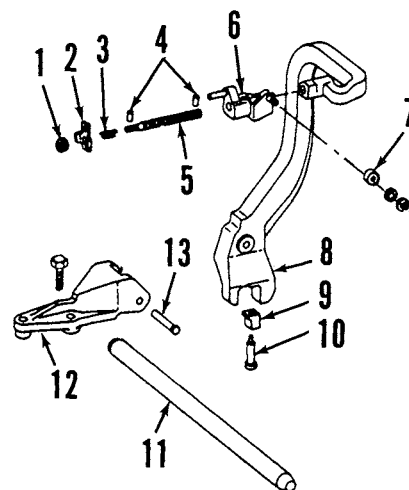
Typical load control arm and associated parts used on 4050, 4250 and 4450 models equipped with Power Shift transmission. Refer to Fig. 259 for legend.
